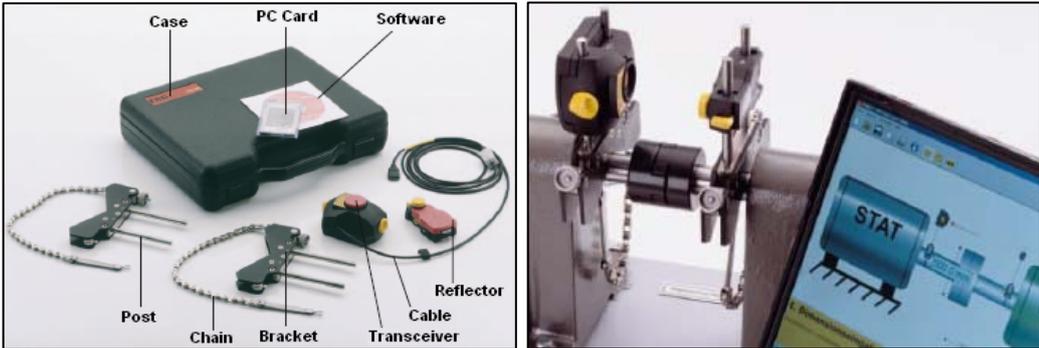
Different components of a laser equipment kit which is used for shaft coupling alignment [WS84]
